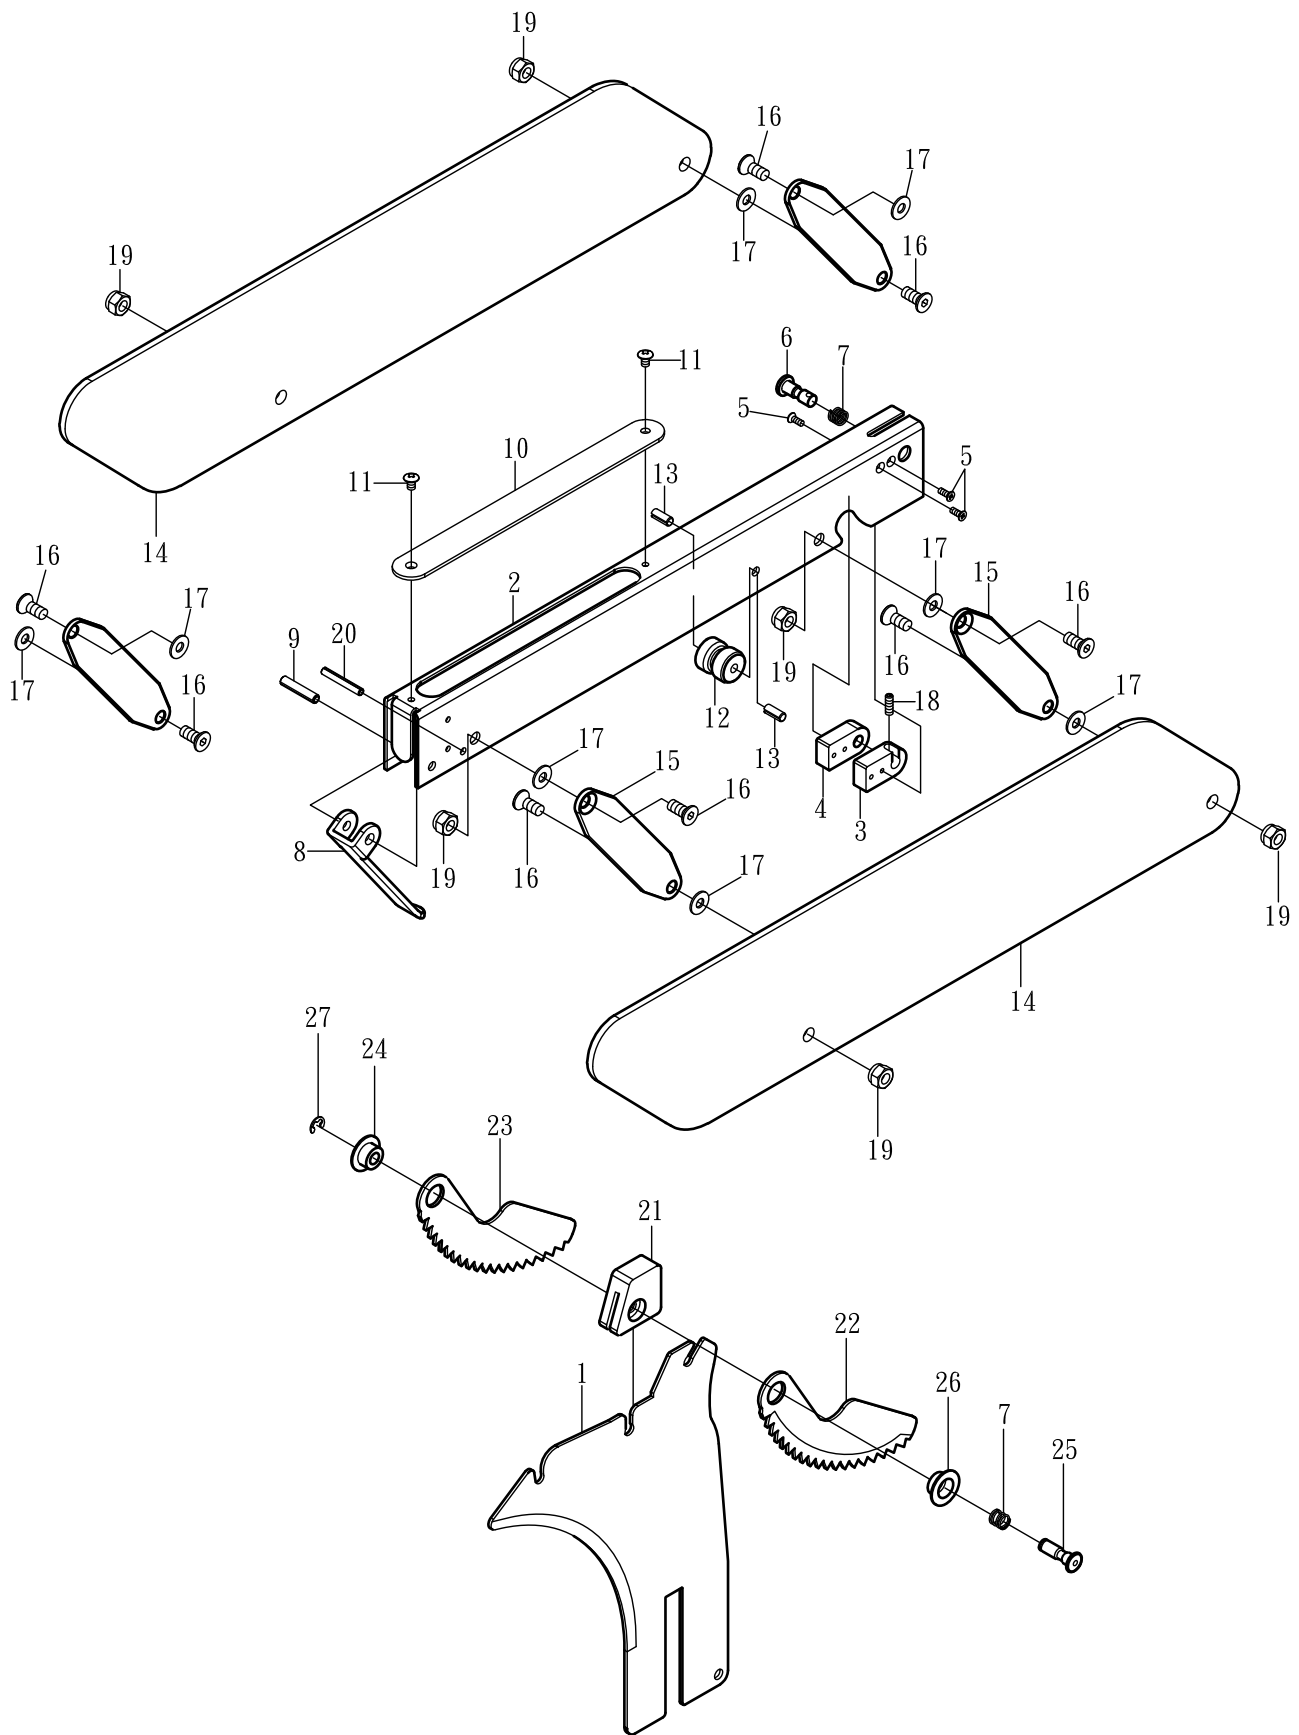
Replacement Parts Illustration for Blade Guard Assembly
